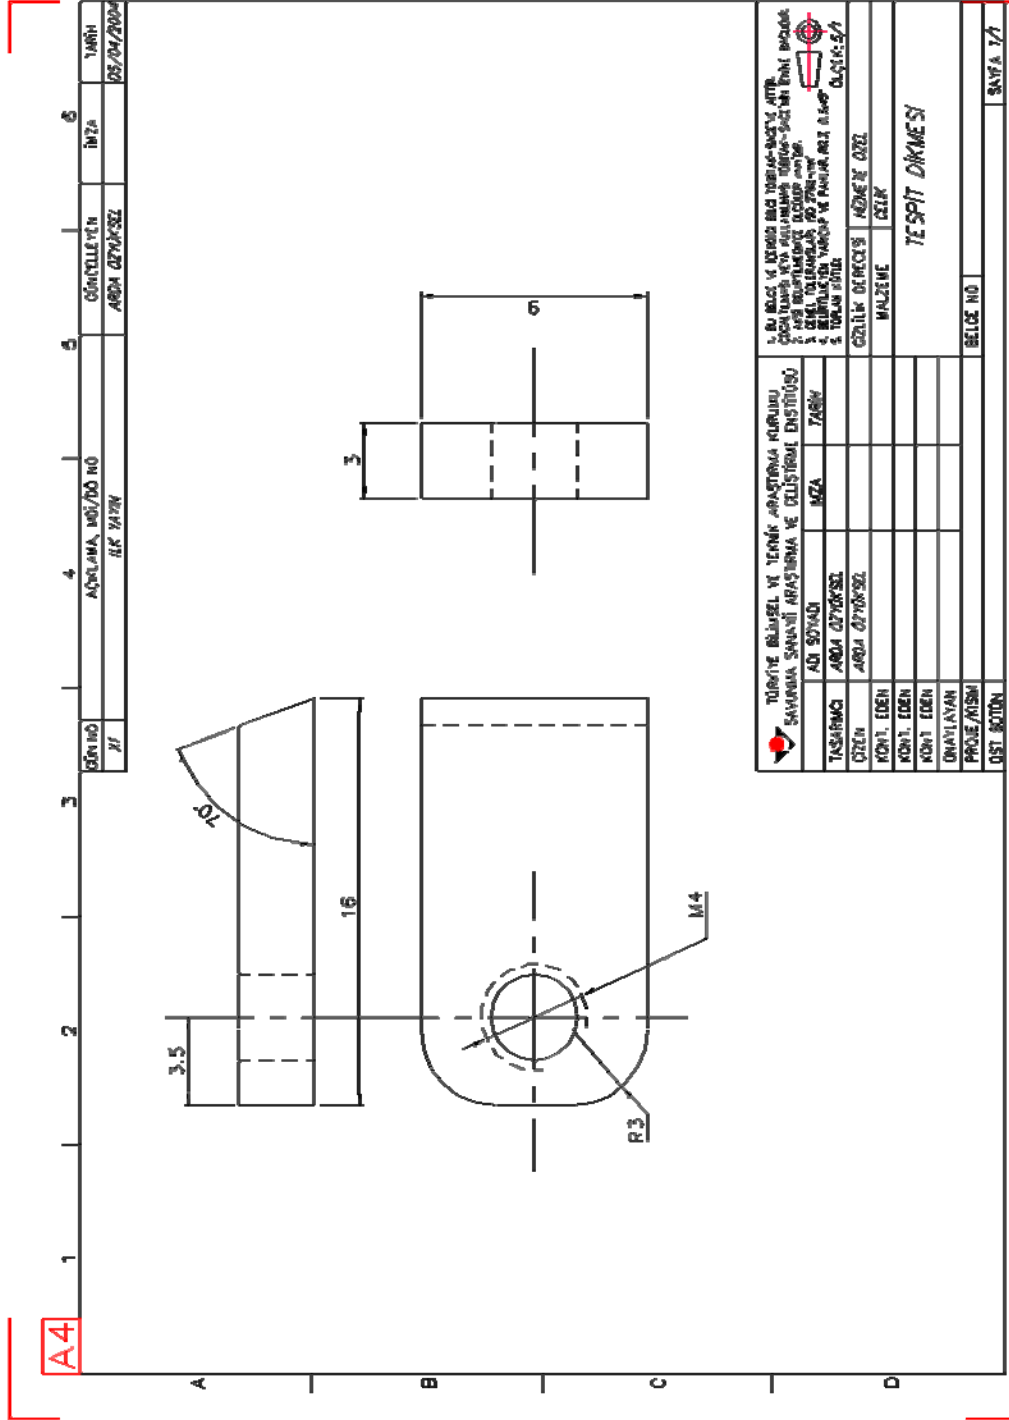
Technical Drawing of Sway Brace of Pylon Model
